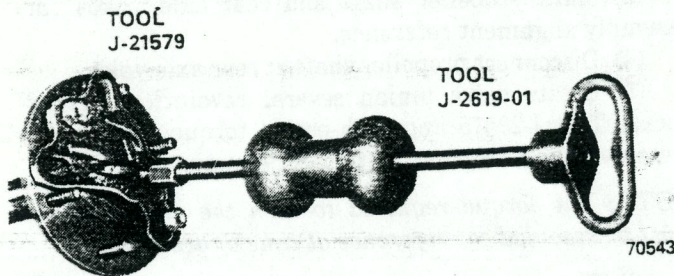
F-24 Axle Shaft Removal—Cherokee-Wagoneer-J-10 Truck
